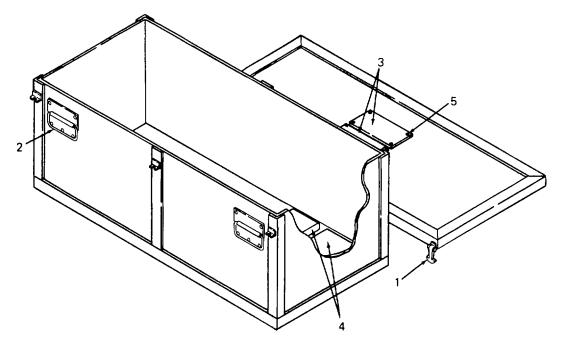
Inspecting/Repairing/Replacing Storage Chests
